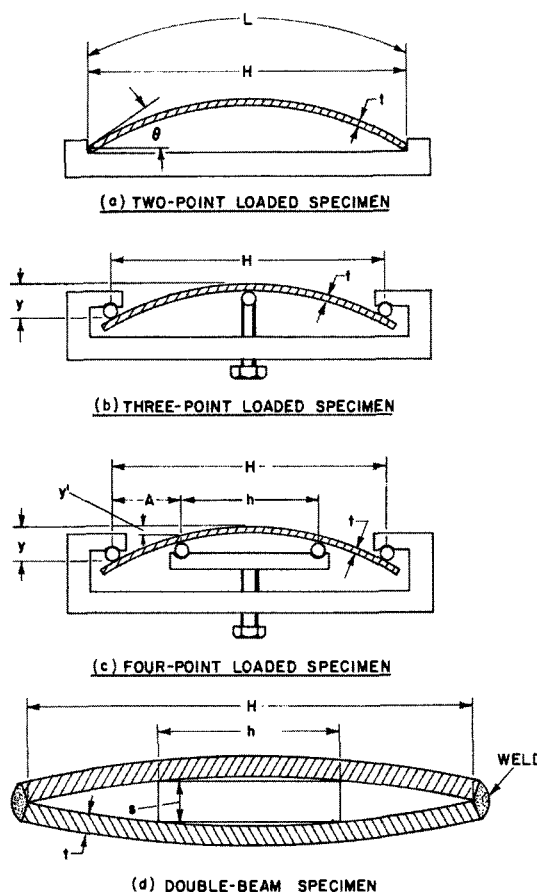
Bent beam specimen designs (see ASTM G 39).
